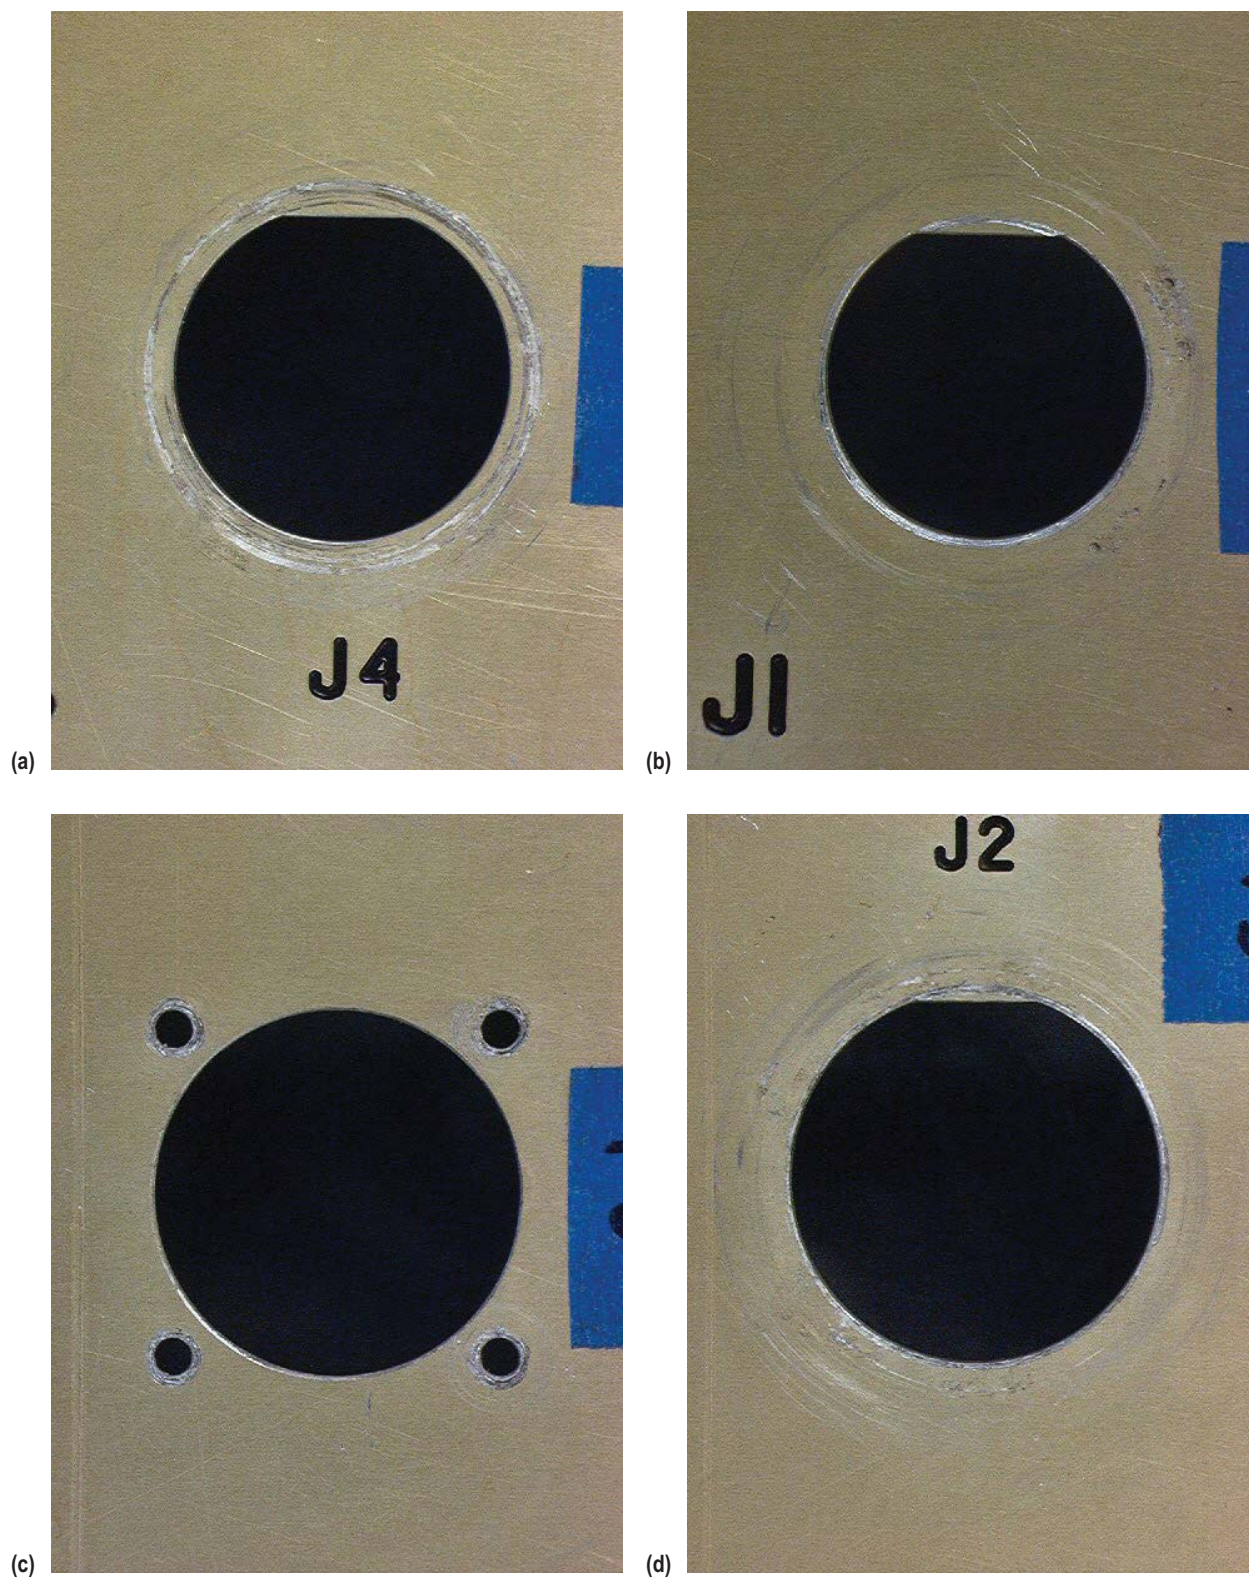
Condition of the plug side of the alodined bracket: (a) Plug side P11, (b) plug side P12 (the only interface on this side that exhibited pitting), (c) plug side P13, and (d) plug side P14.
